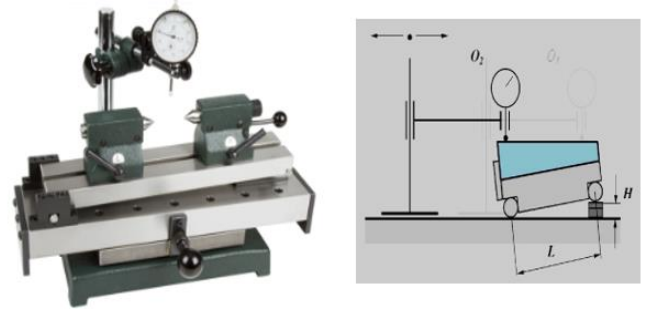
Measuring the machine tapered shaft by using a set of sinus table, dial indicator set, and gage block set.
